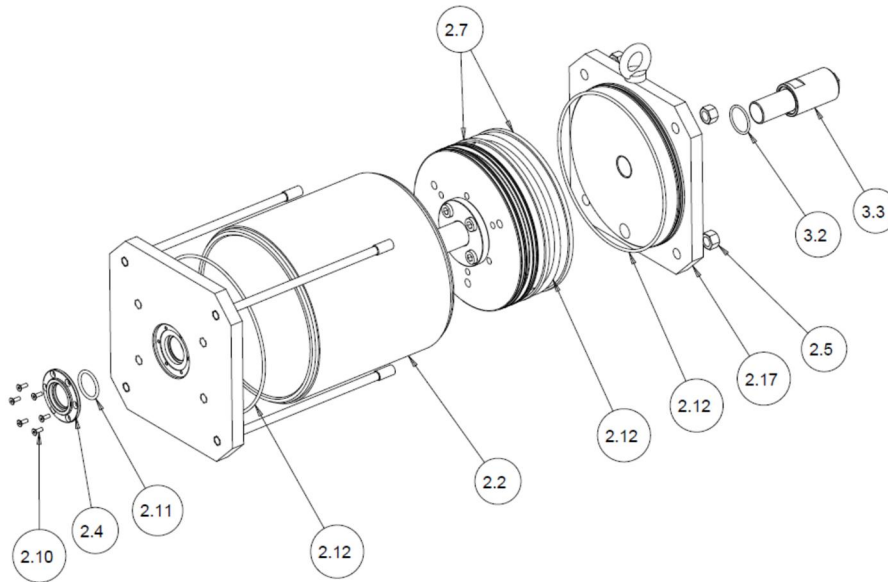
Pneumatic cylinder seals replacement of double acting actuator
